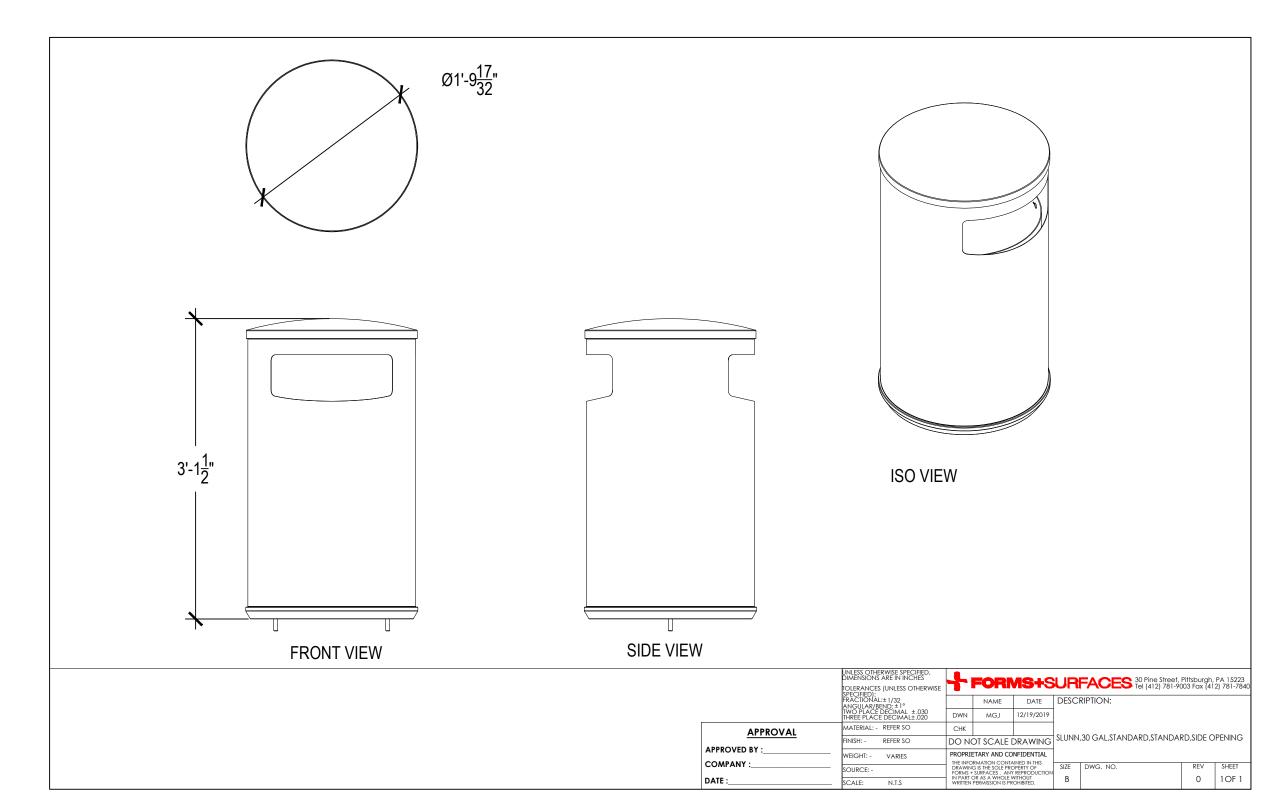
Dimensions are in inches U.S. Patent No.: D608,913
